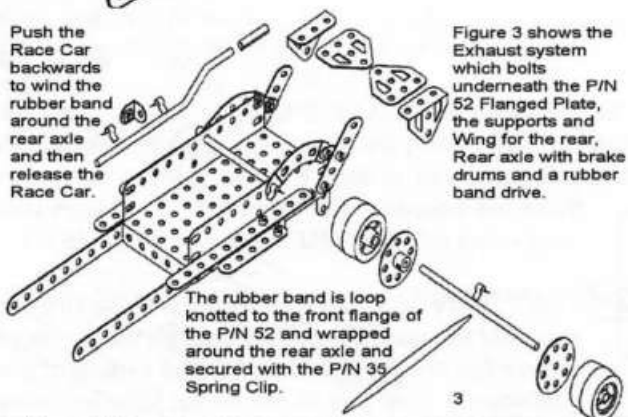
shows the Exhaust system which bolts underneath the P/N 52 Flanged Plate, the supports and Wing for the rear. Rear axle with brake drums and a rubber band drive.
